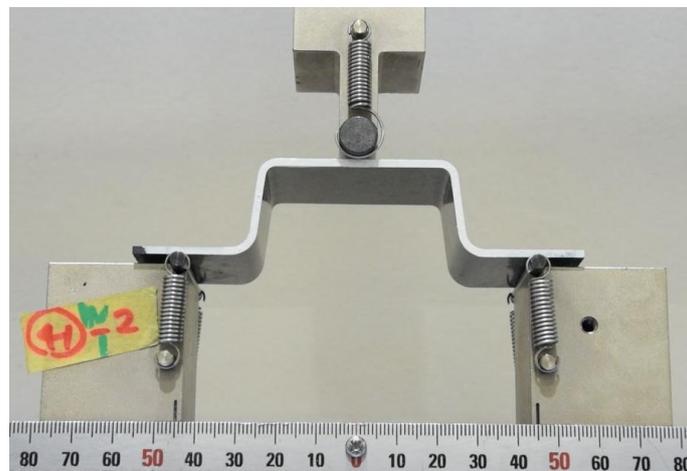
Picture of three-point bending test for hat shaped specimen.
